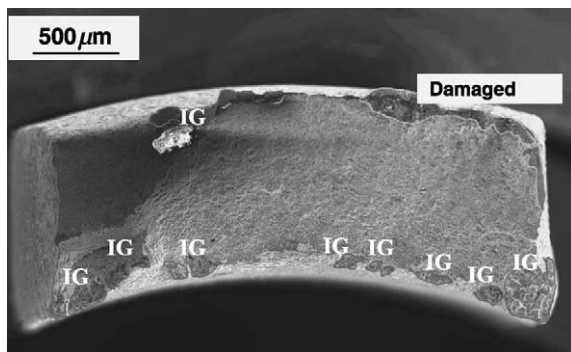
Fracture surface exhibiting IG cracks in the periphery over the fracture surface.
